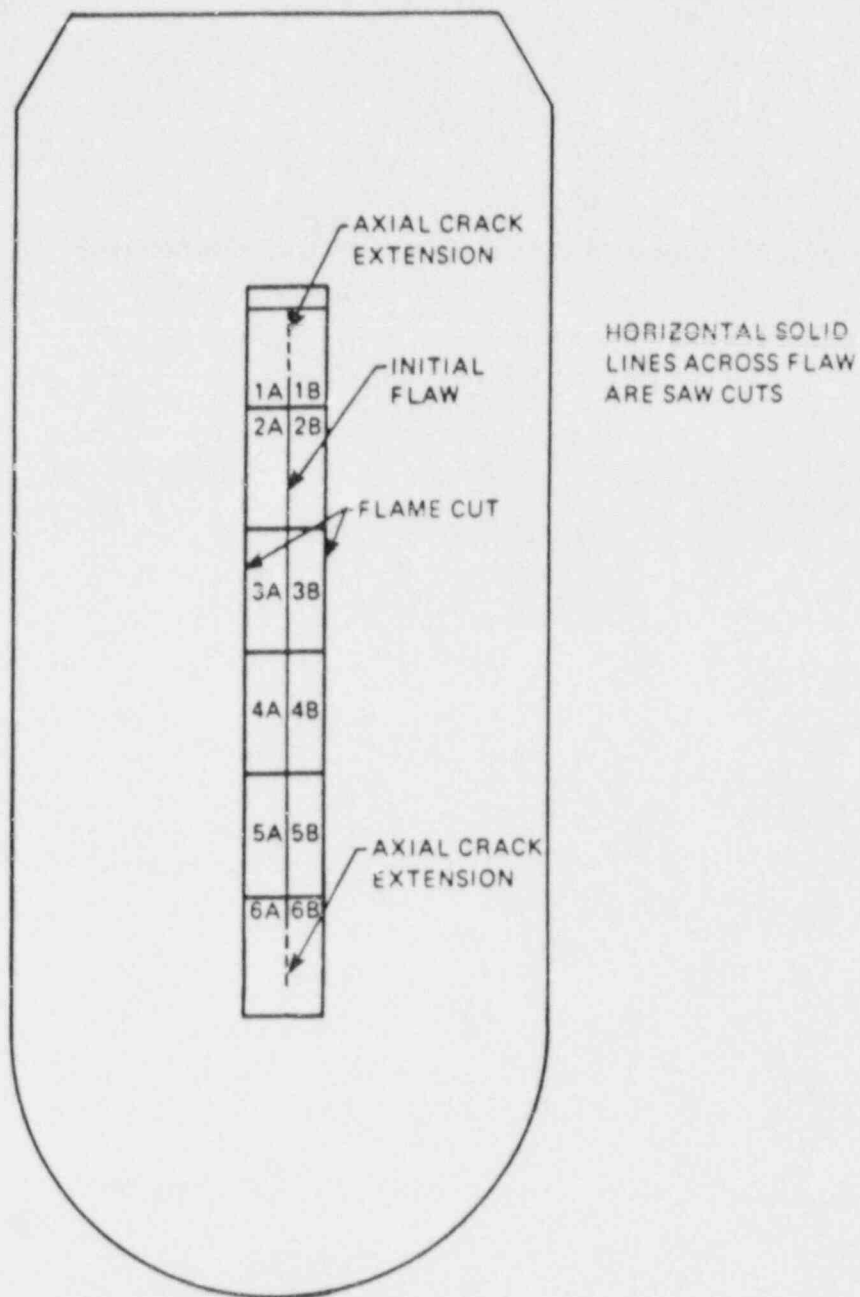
Scheme for cutting and labeling segments of the block containing PTSE-2 fracture surfaces. Surfaces labeled A are viewed toward left, and B, toward right.
